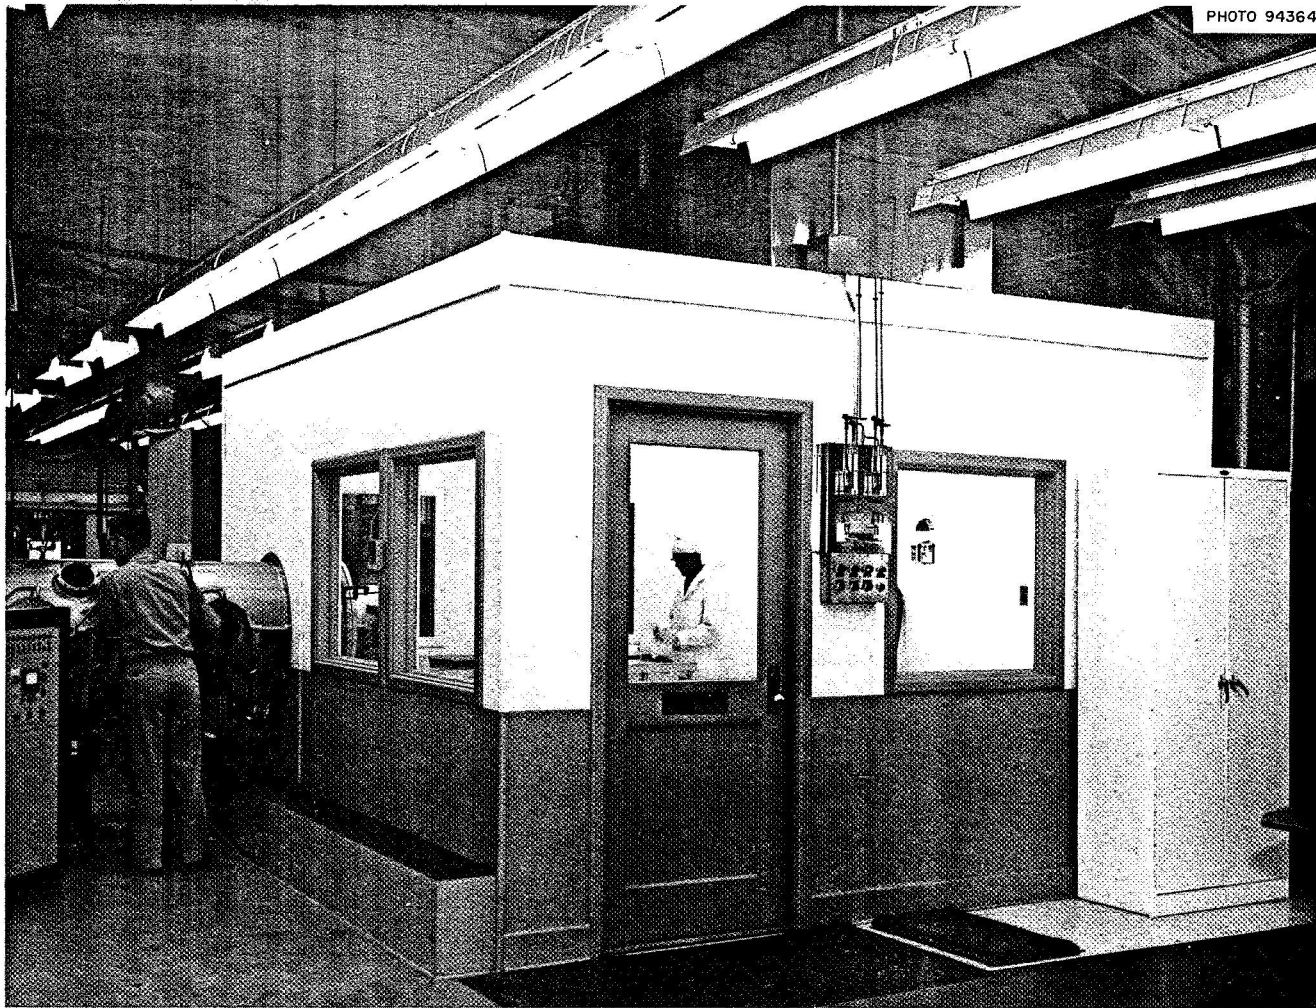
Clean Room and Dry Box Welding Facility in ORNL Building 7003.
